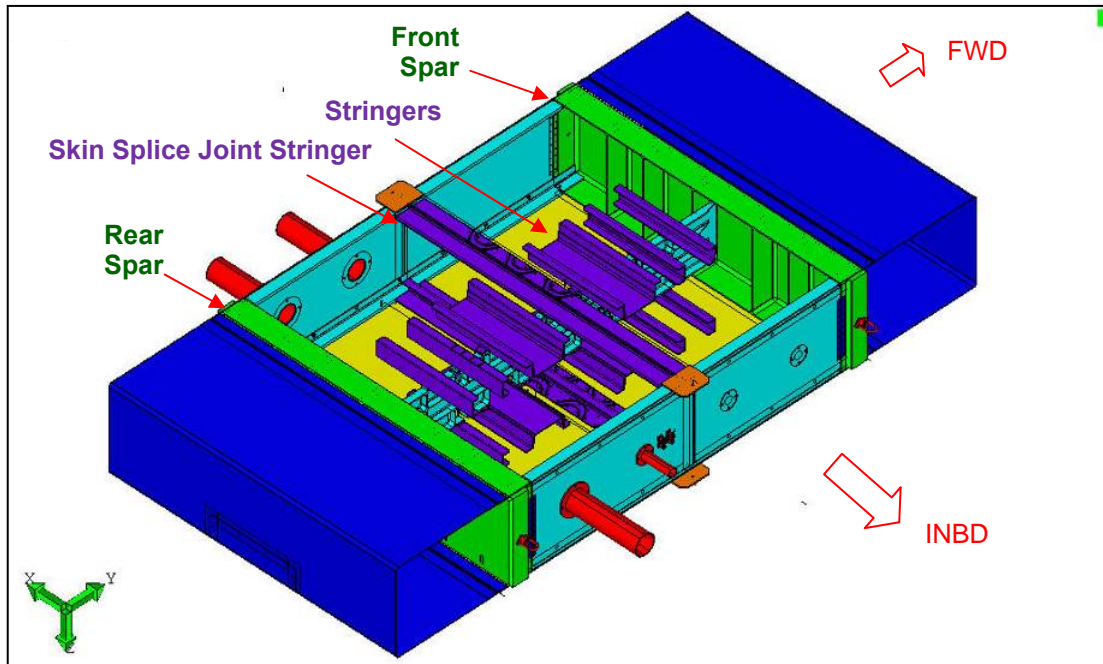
Partial Cutout Wing Section ("Unit Cell") for Test - Top Surface Removed
